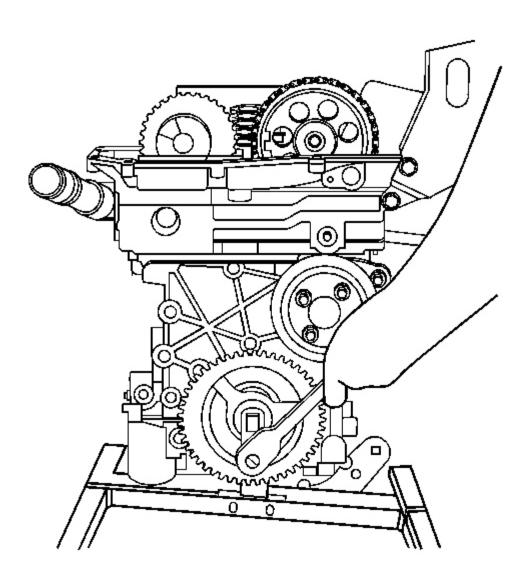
Rotating Engine Clockwise Courtesy of GENERAL MOTORS CORP.
